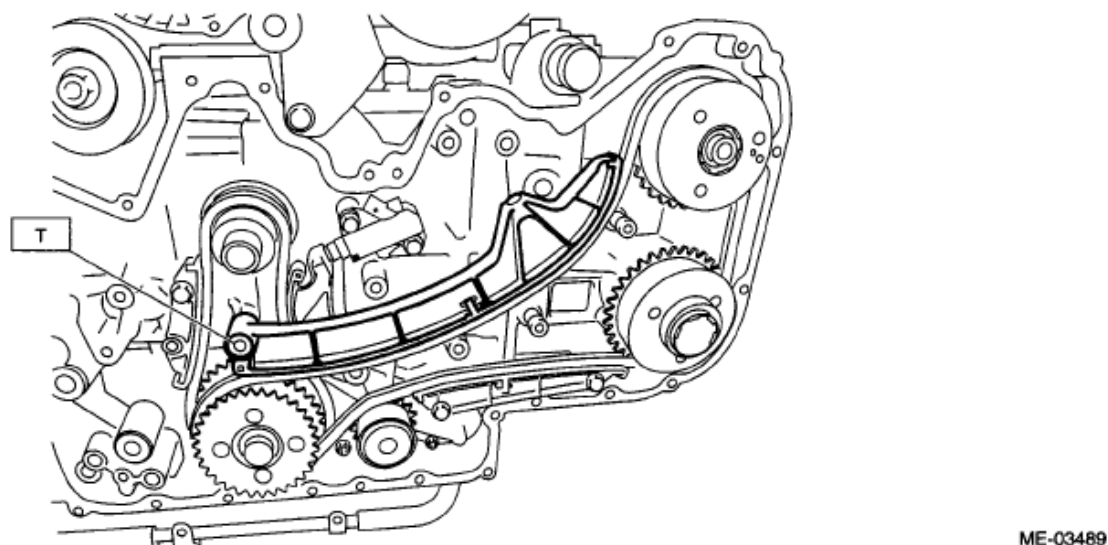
Identifying Chain Tensioner Lever (LH) Bolts Tightening Torque
